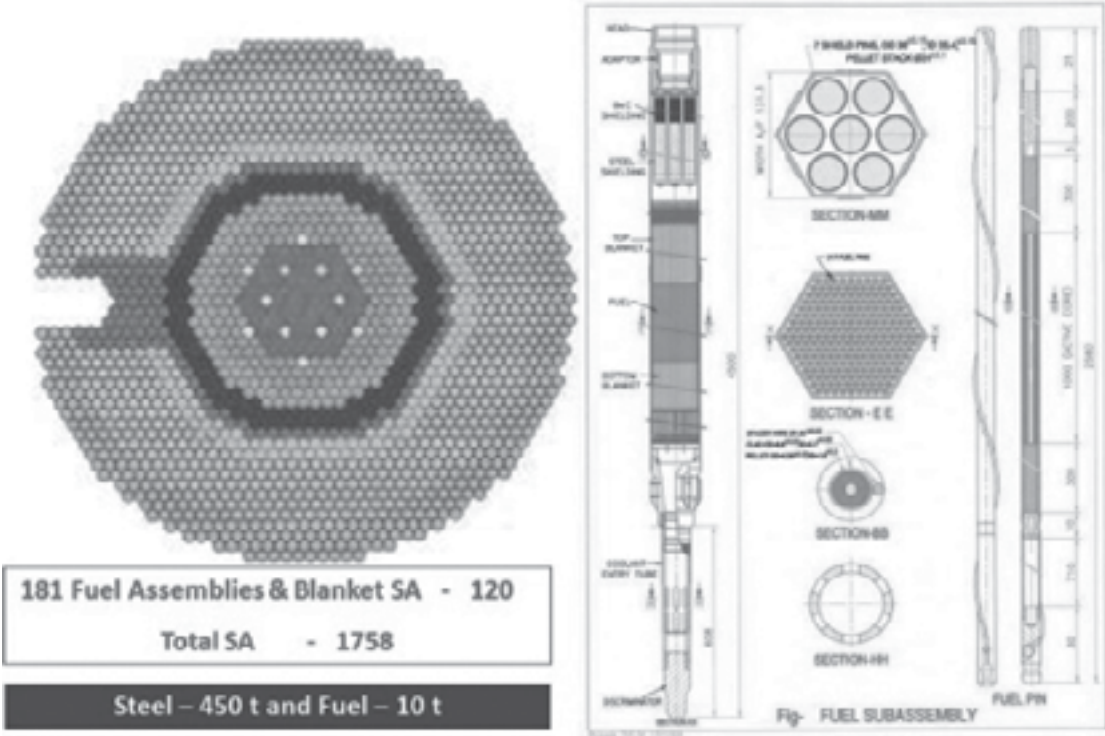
PFBR 500 Core With 181 MOX Fuel Assemblies In Centre Surrounded By 120 RDU Oxide Blanket Assemblies
